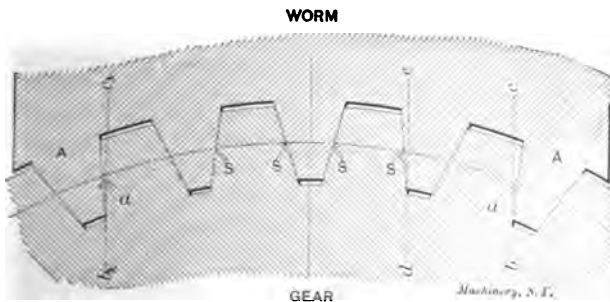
Section of Hindley Worm and Gear on Middle Plane
